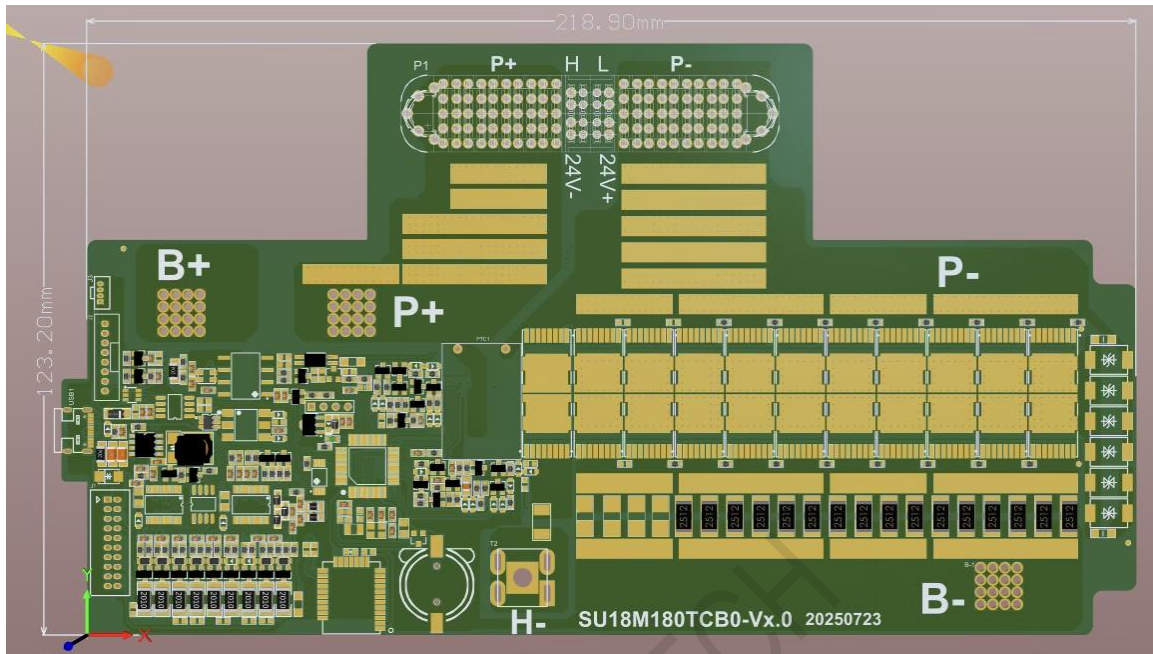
Product Photo - PCB Dimensions (218.9 mm x 123.2 mm)
